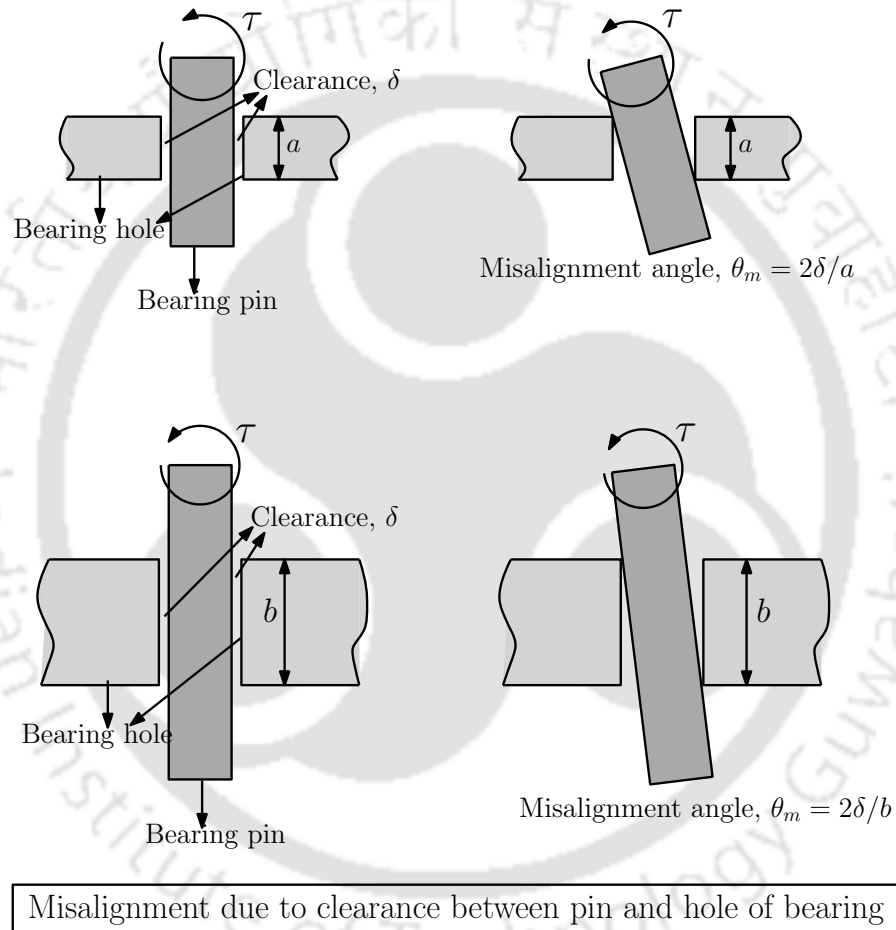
Misalignment due to clearance between pin and hole of bearing.
